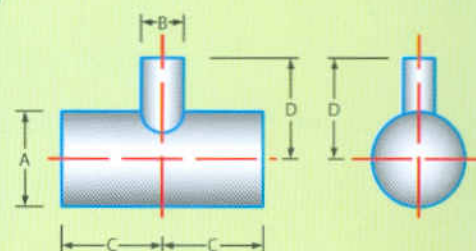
Plain End Tee for Slip-on Type Coupling and Butt Welded Joint
